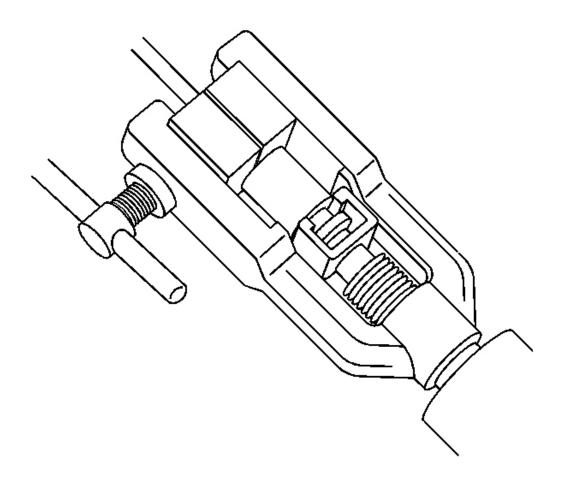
Bottoming Forming Mandrel Against Clamping Dies Using Pipe Flaring Tool
